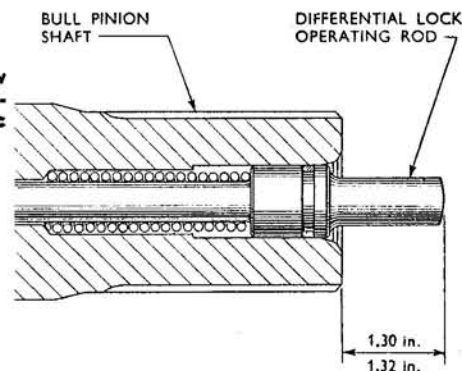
Adjust nut (2—Fig. 150) so that differential lock operating rod protrudes 1.30-1.32 from bull pinion shaft.
